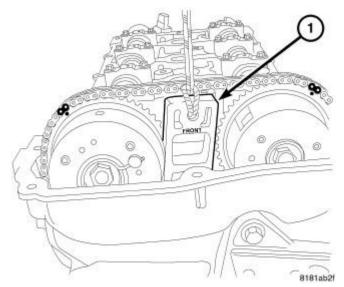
Wedge 9701 Between Camshaft Phasers Courtesy of CHRYSLER GROUP, LLC
